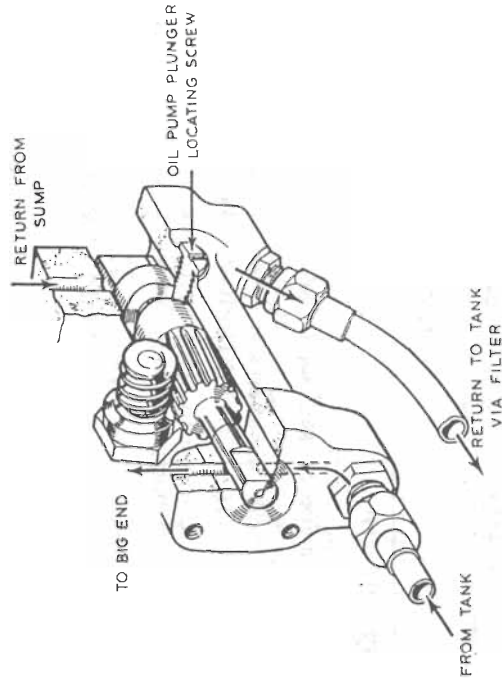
THE J.A.P. DOUBLE-ACTING OIL PUMP
